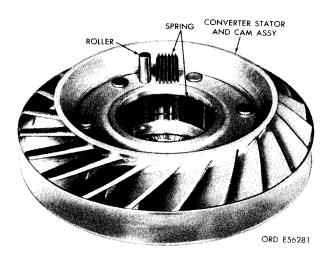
Converter stator and cam assembly, showing relation of components.
